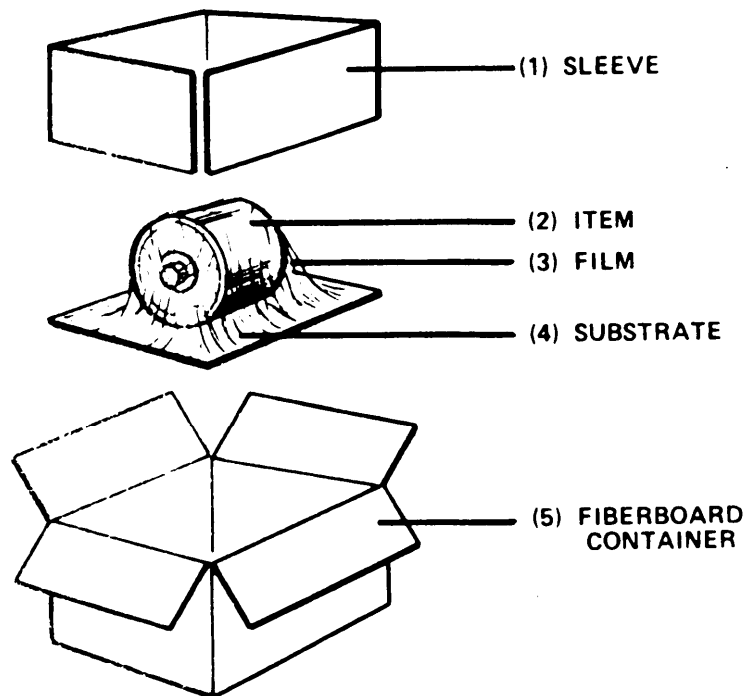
Steps used in shrink-film internal bracing (immobilization).
